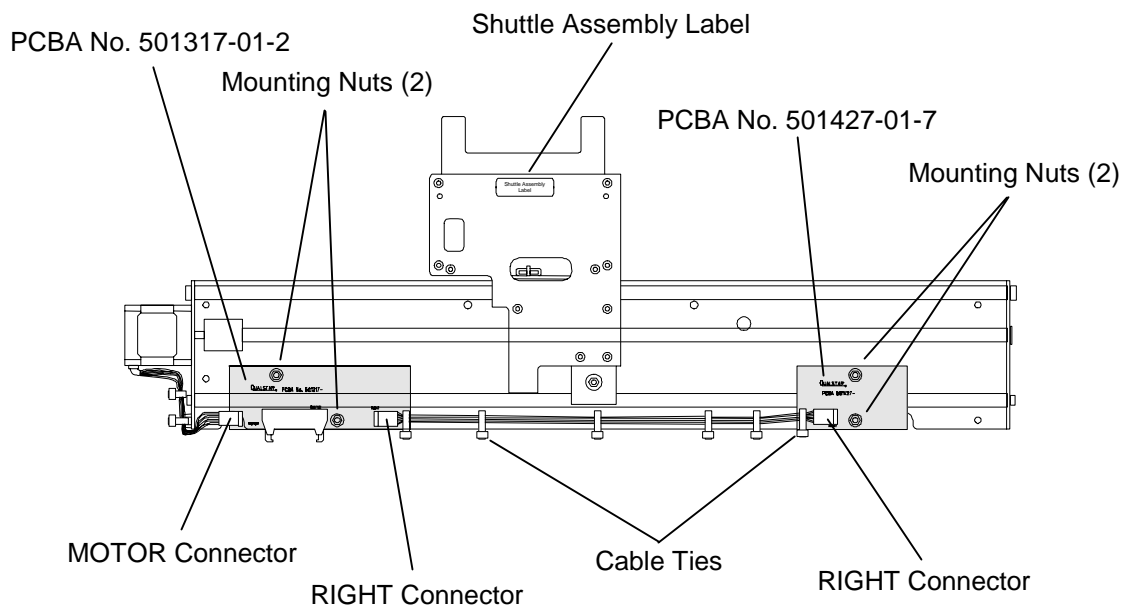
Shuttle PCBAs (Shuttle Assembly Bottom View)
